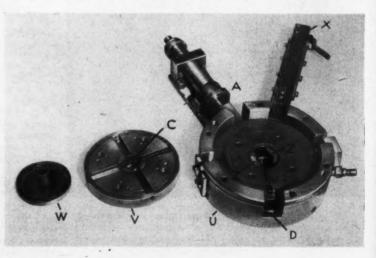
Automatic air gauging heads, of the design here shown, are provided on the "post-gauging" Bryant machines, and control the "back-off" position to which the wheel is withdrawn before it is advanced for dressing
